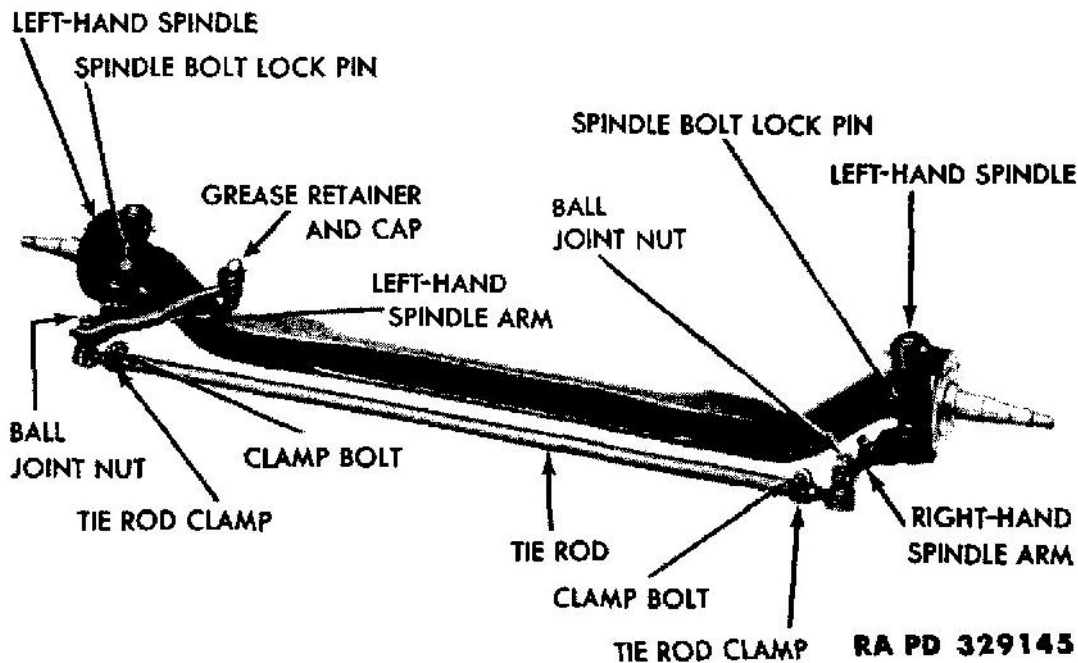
Front Axle, Spindles, and Tie Rod Assemblies
